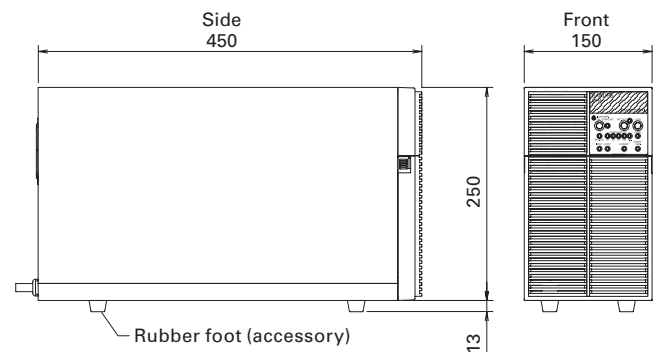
“SANUPS E11A152 tower type” dimensions (unit: mm)
